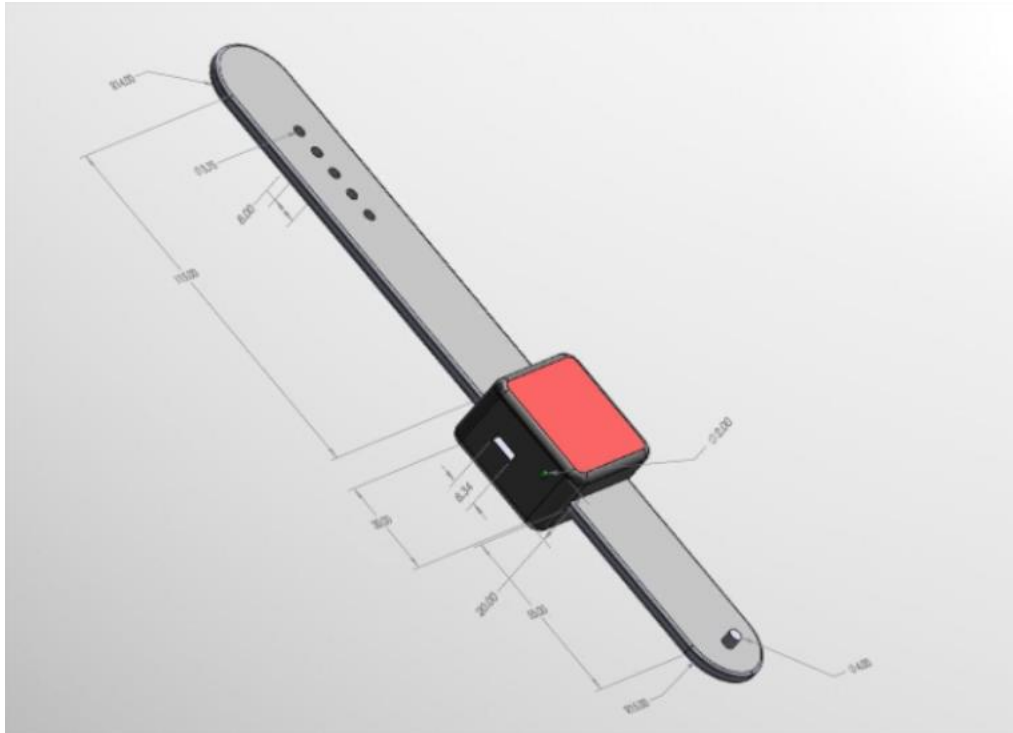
Isometric View of Proposed Final Design Drawing (all measurements in mm)
